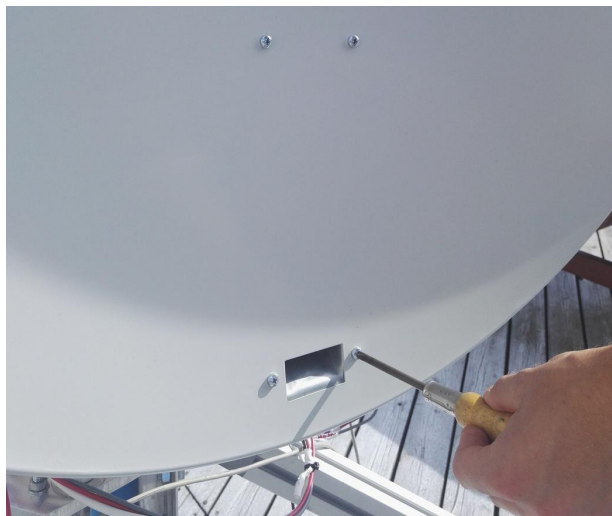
Front of the dish showing the mounting for the arm that holds the feed.
